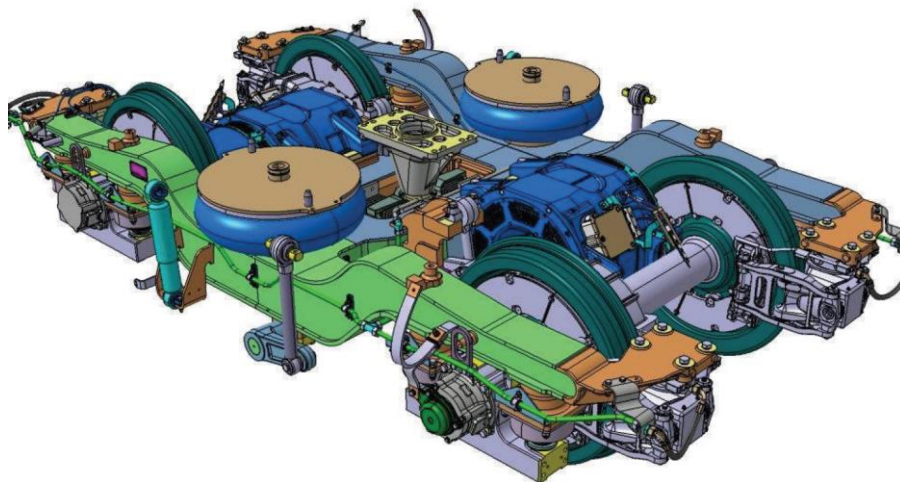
CL 606 by Alstom. Bolsterless, pivot combined with airsprings [16, p. 16]
